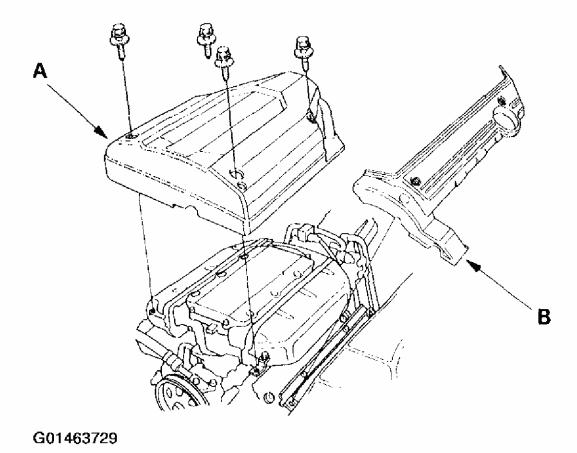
Removing The Intake Manifold Cover & Ignition Coil Cover Courtesy of AMERICAN HONDA MOTOR CO., INC.
